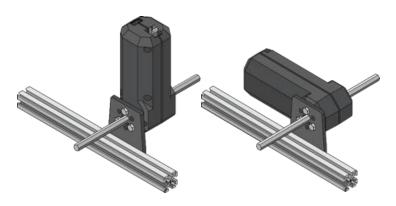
Hex Core Motor Mounted with 5mm Shaft Inserted
